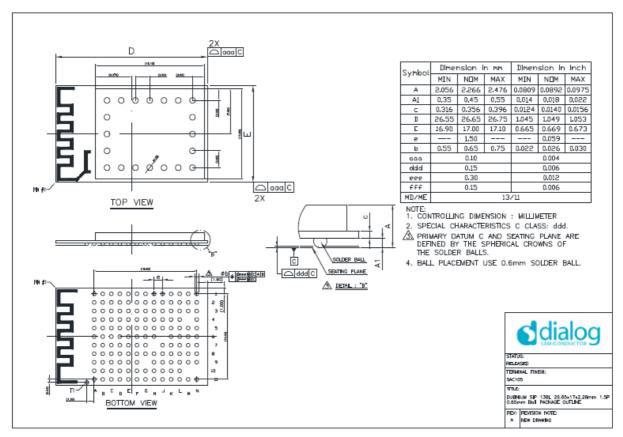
DA14AVDDECT BGA Package Outline Drawing
